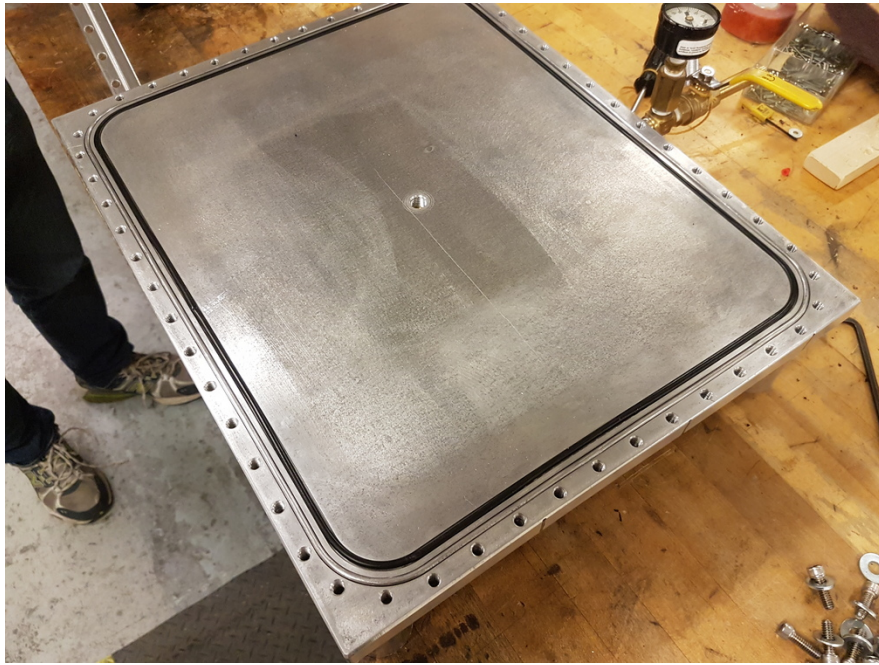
Base plate for Frame 3 and 4 with O-ring and clamping wire in place.
